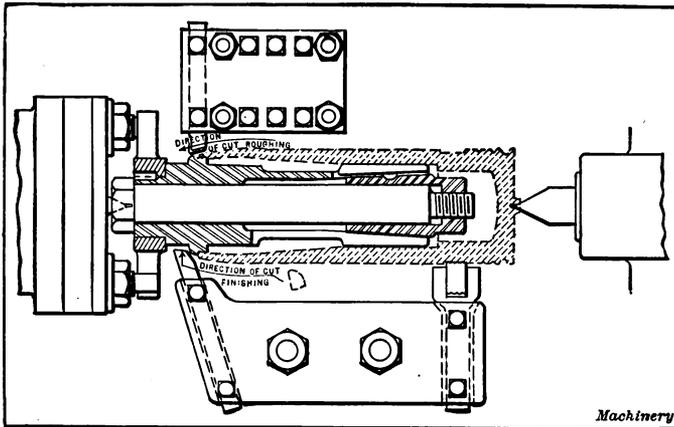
Tool Arrangement for turning Shrapnel Shell Point and knurling Groove at Closed End
